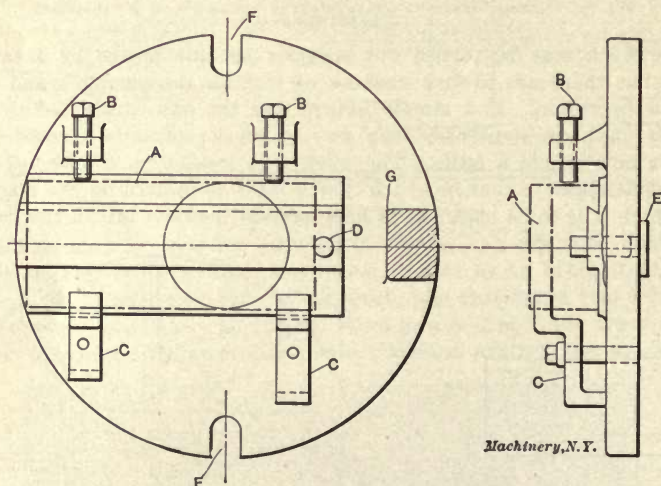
Fixture for Recessing Work shown in Fig. 182
